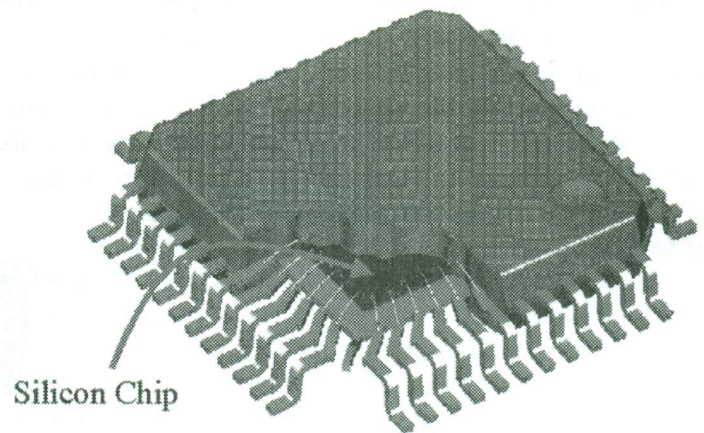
Cut away view of a gull-wing chip carrier.
